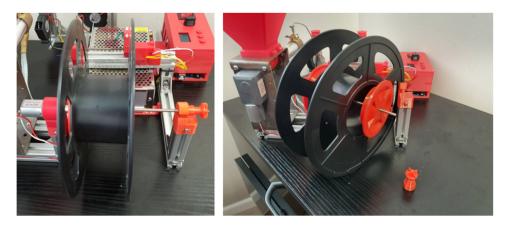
Left: spooler system when in operation. Right: spool is removed from the motor shaft.
